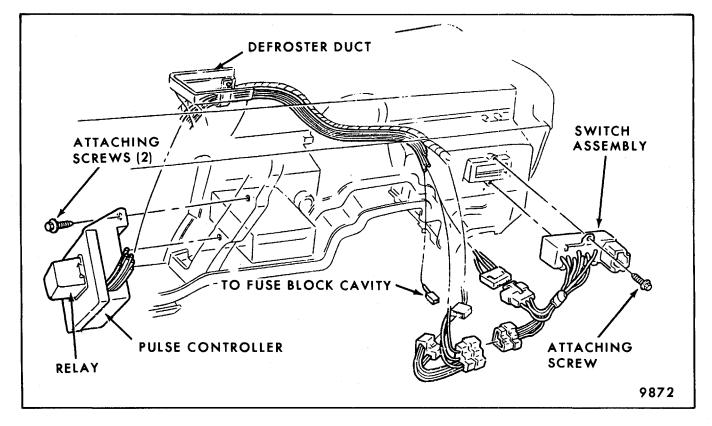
Windshield Wiper Installation - Chevrolet X Styles - Nonpulse and Pulse Type - Pontiac, Oldsmobile and Buick Similar
